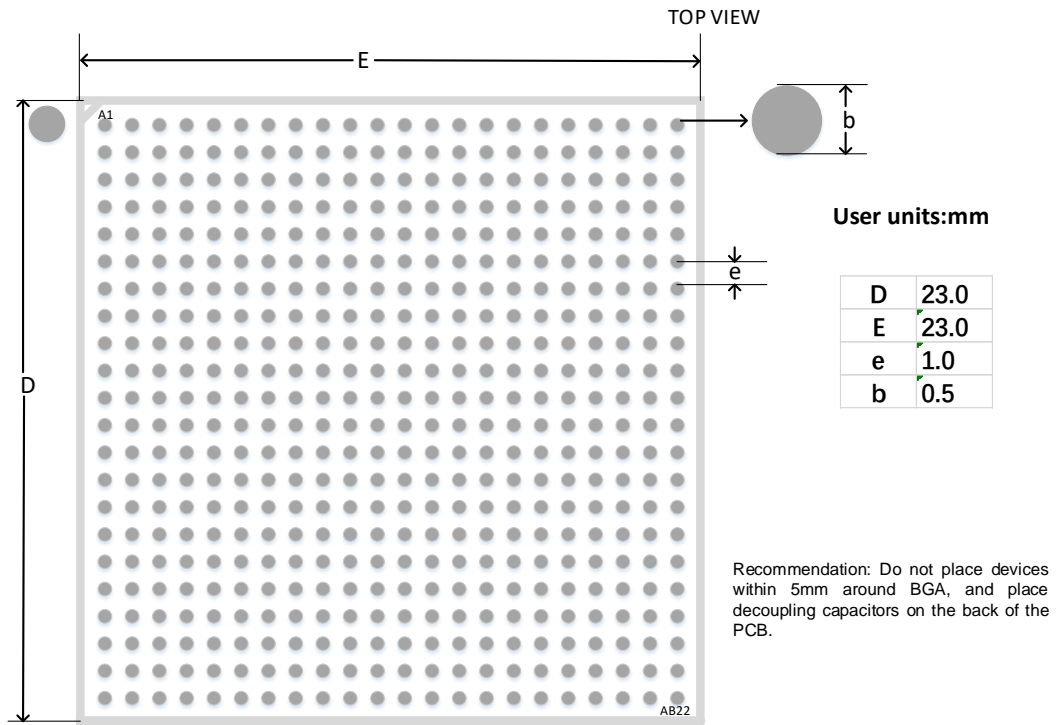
Recommended PCB Layout PG484A (GW5AT-138)
